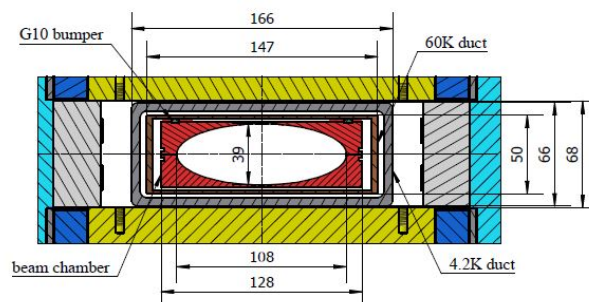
Cross-section of the beam chamber, 60 K duct and 4.2 K duct (unit: mm).
